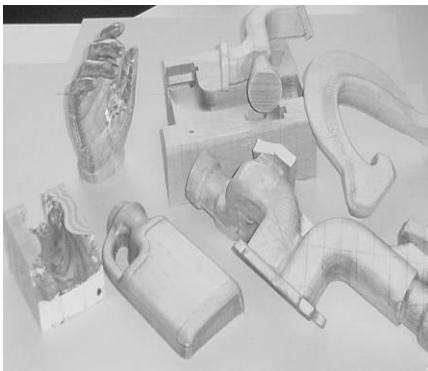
Parts Manufactured on LOM machine in the CRPD Figure 8 : Parts Manufactured on Z Corps 3D Printing Machine
